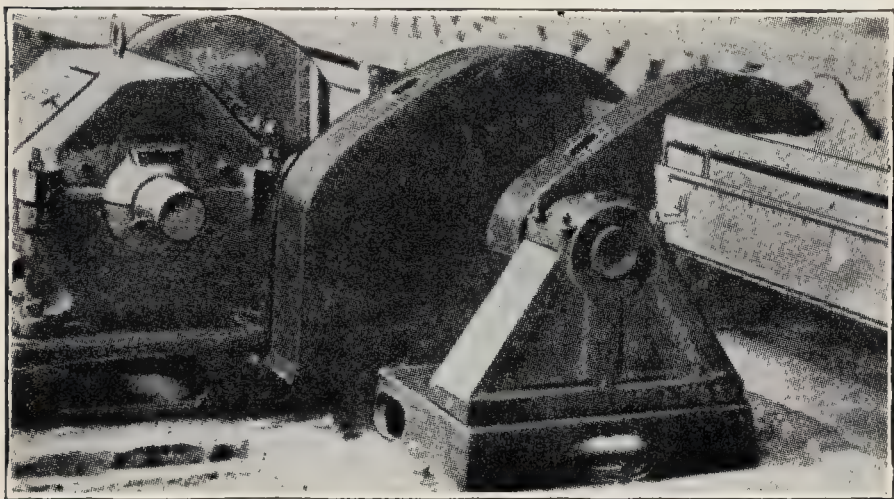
A motor with gears completely covered driving a transfer table in the U. S. Steel Corporation.
